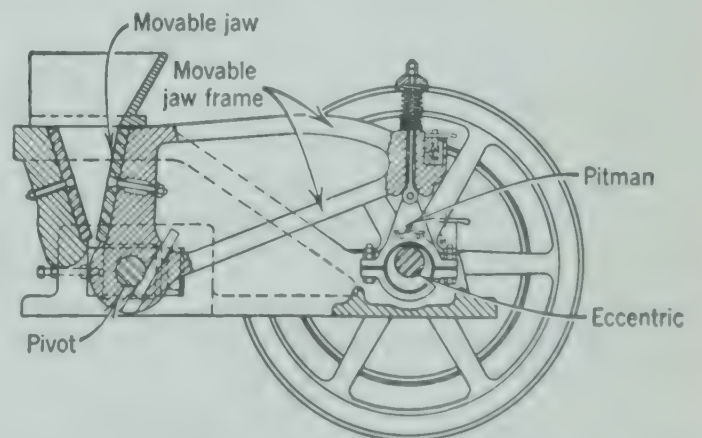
Sectional drawing of Dodge-type jaw crusher. (Allis-Chalmers Mfg. Co.)
